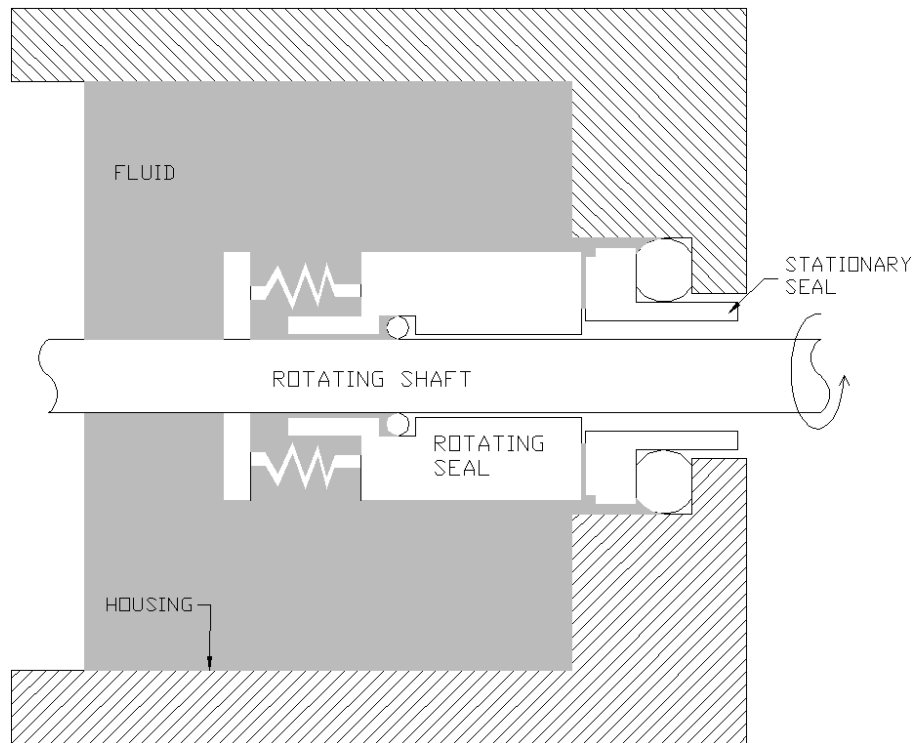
Schematic Representation of a Mechanical Seal Face
